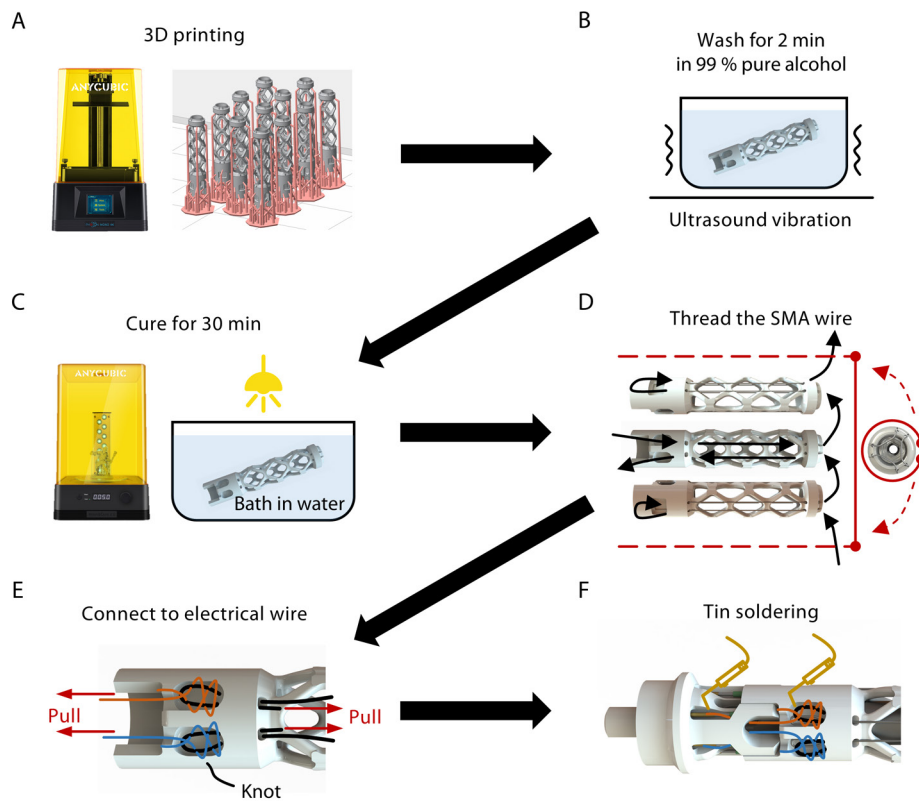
The manufacturing process of the SMA clutch. (A) 3D-printing process. (B) Ultrasound cleaning. (C) Ultraviolet Curing. (D) Thread with the SMA wire. (E) Wiring. (F) Tin soldering.
